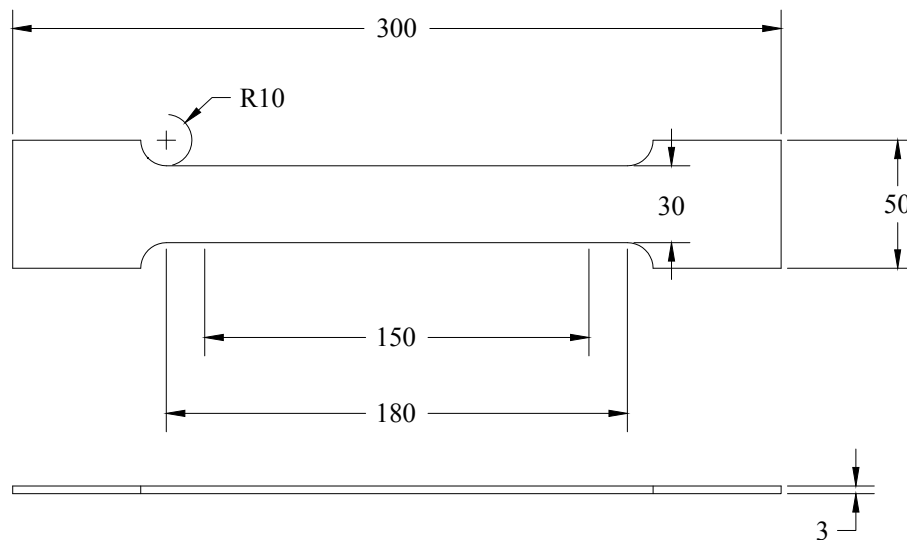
Tensile Testing; Steel Coupons tested. All dimensions are in mm.
